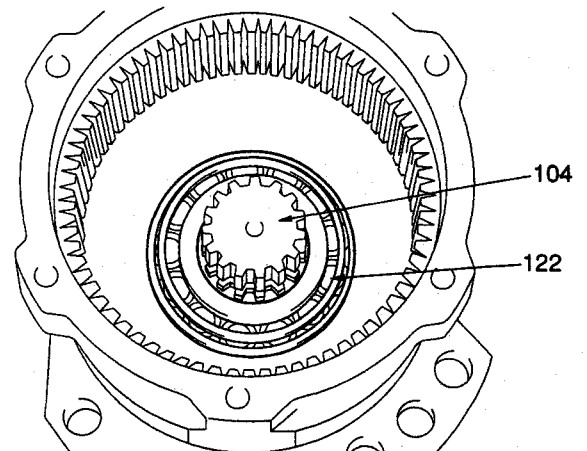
Press-fitting inner race of the taper roller bearing (122)
